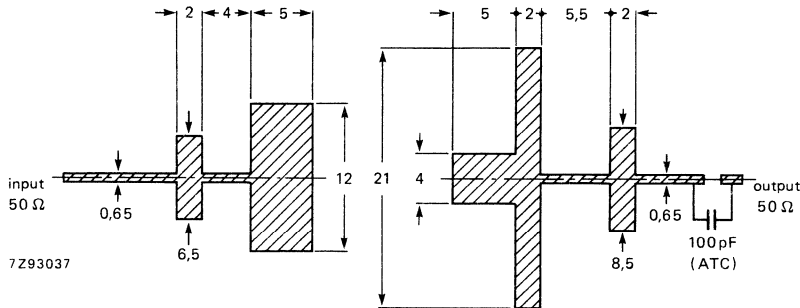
Wideband test circuit boards for 1.4 to 1.8 GHz (dimensions in mm); Epsilam p.c. board; thickness 0.635 mm; $\epsilon_r = 10$.
